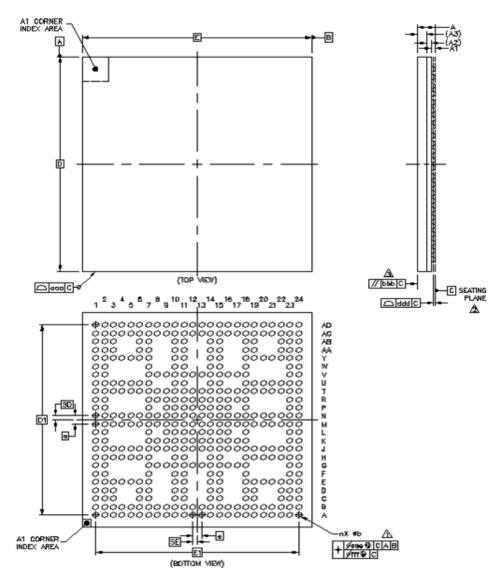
13 x 13, 0.5 mm BGA Package Top, Bottom, and Side Views
